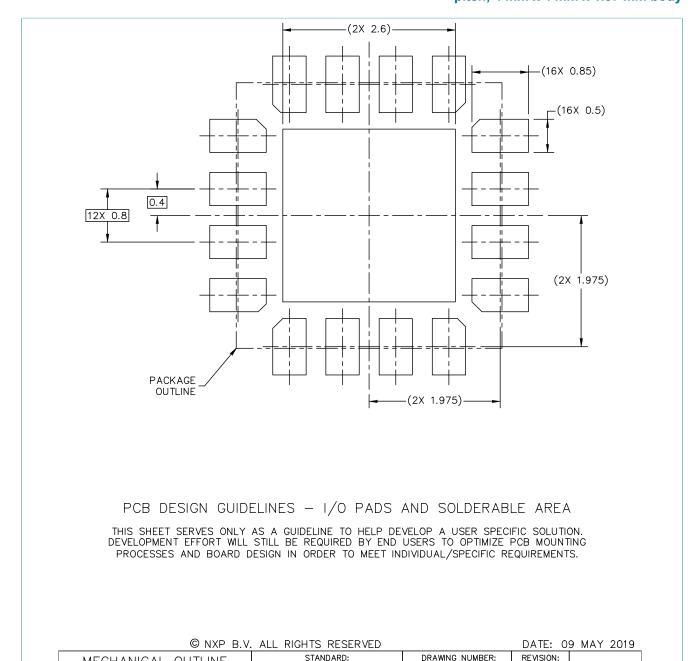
Reflow soldering footprint part2 for HLQFN16 (SOT1688-2(SC))
